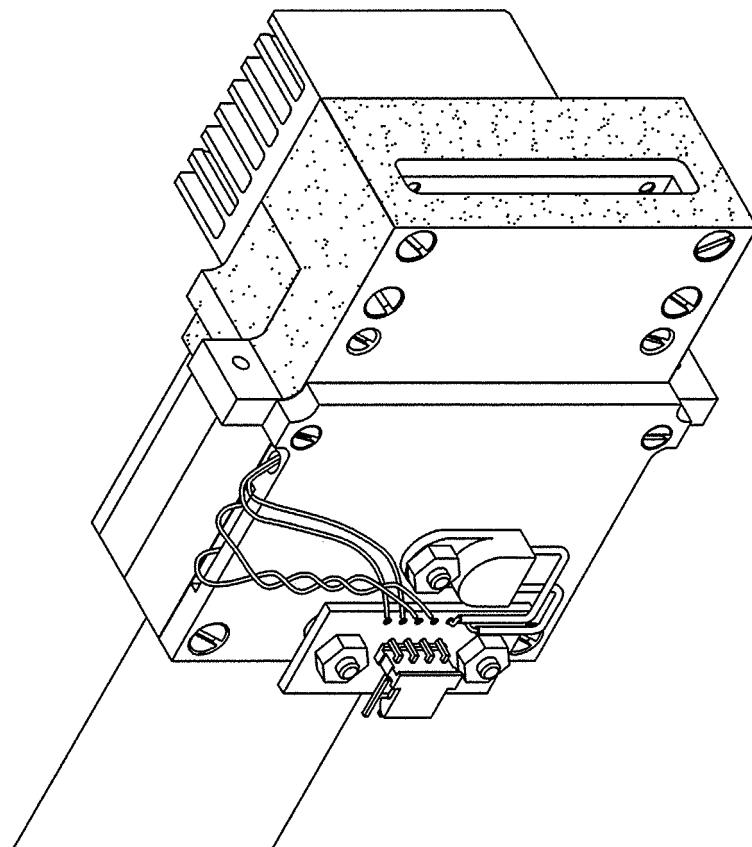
00024305380 GEM 3500 BACKPLANE BOARD
